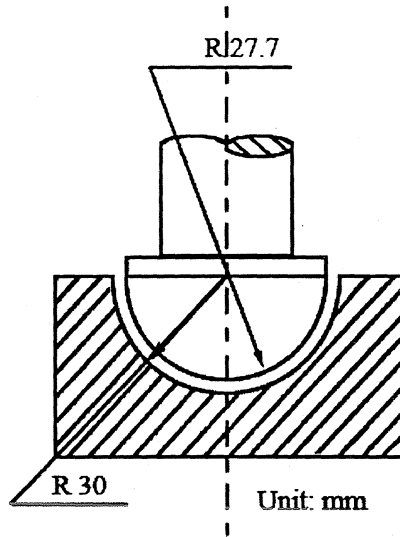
Geometrical details of the three-dimensional hemispherical mould.
